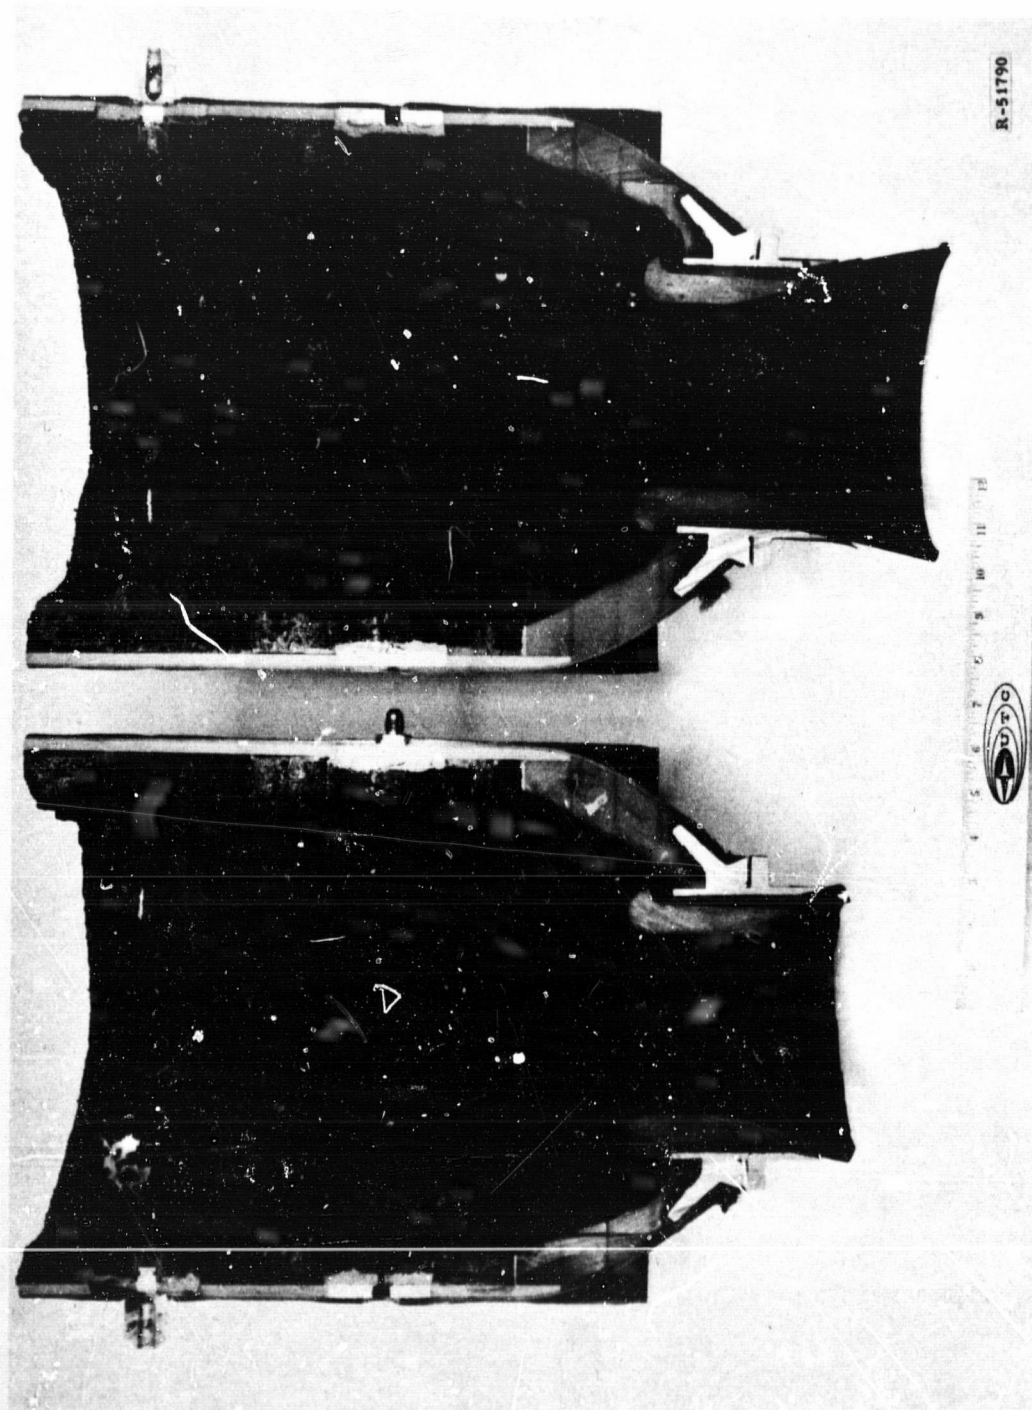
(U) Mixer Assembly From Motor 008 After Test
